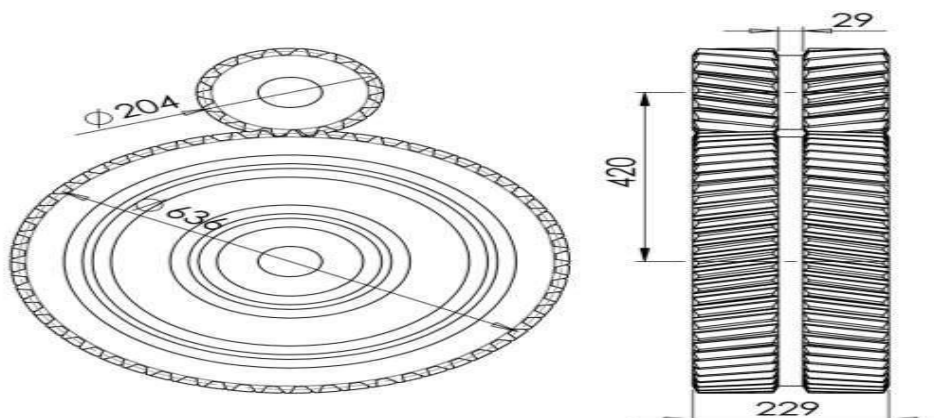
2D Drawing of Gear with Groove and Taper Edges Module 10 Gear Dia 204 & Dia 636
